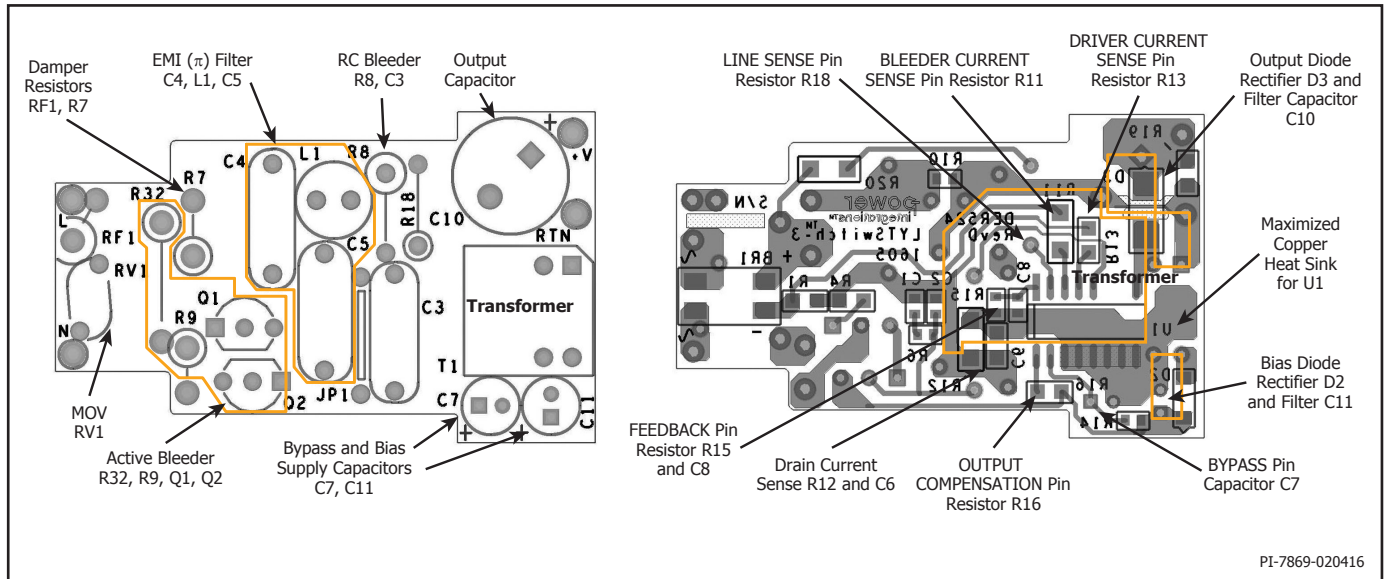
Single-Side PCB Layout Example Showing the Arrangement and Location of Critical Components.
